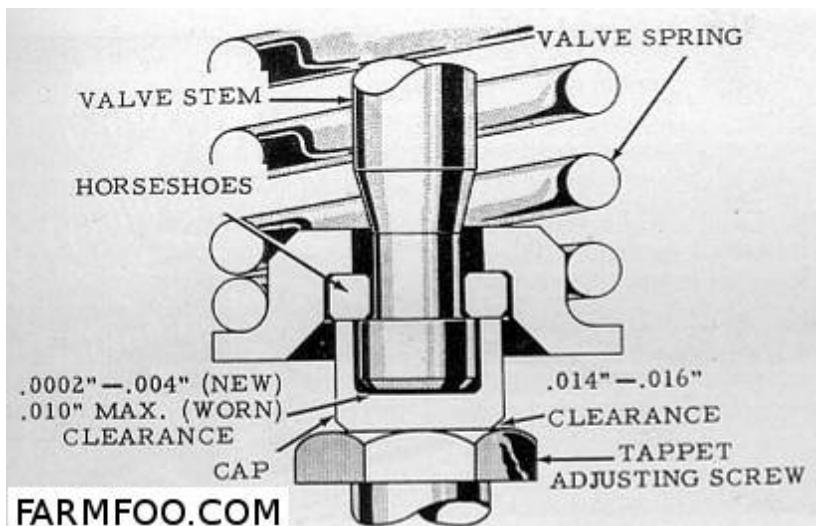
Free valve type exhaust valve rotators used on later engines and available in kit form for early engines.
